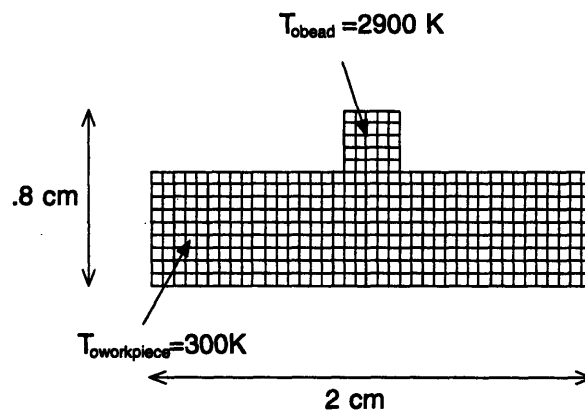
Cross Section used for Stream Welding Models (Case 1)
